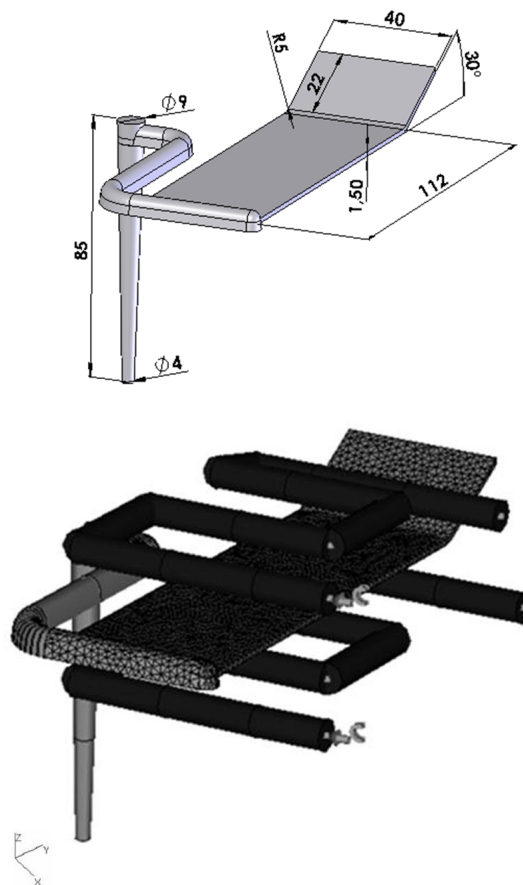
Moulding geometry, mesh and initial cooling system (dimensions in mm).
